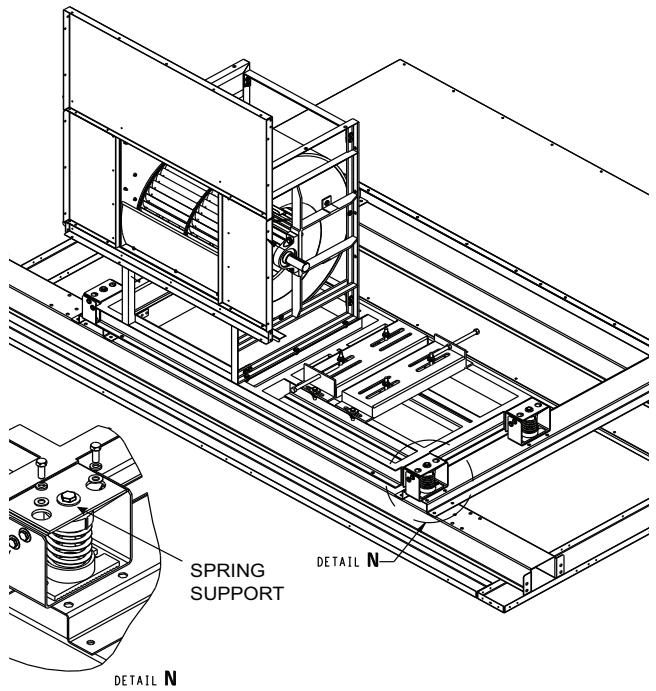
Supply Fan and Power Exhaust Fan Shipping Bracket Bolts
